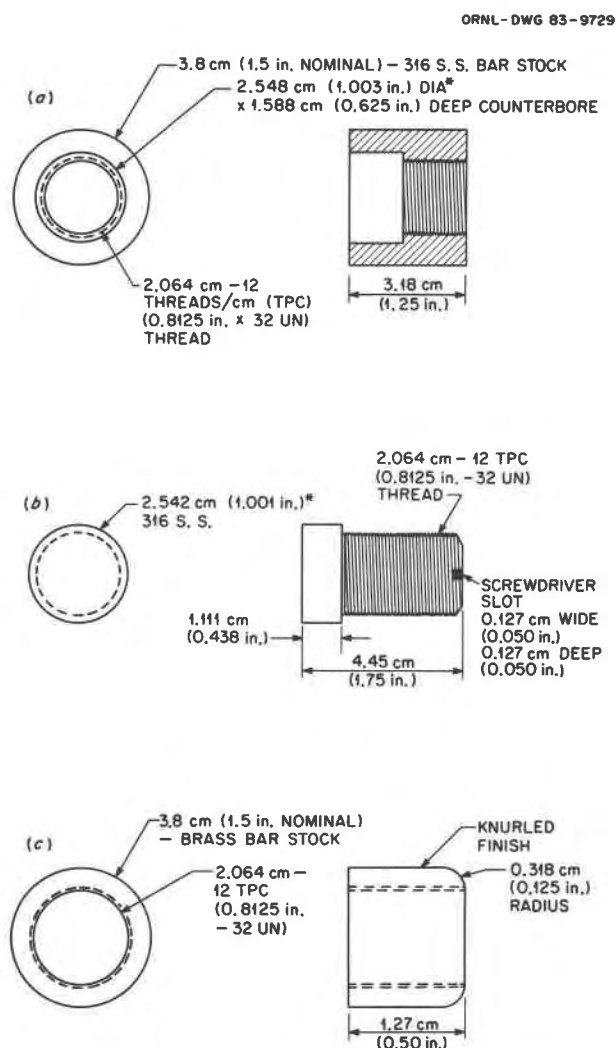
(a) Body of grinding/polishing tool. (b) Sample adjusting screw. (c) Lock nut. These dimensions shown with an asterisk must be adjusted to accommodate the users supply of glass slides, since the diameter of these slides varies from lot to lot and within lots.
